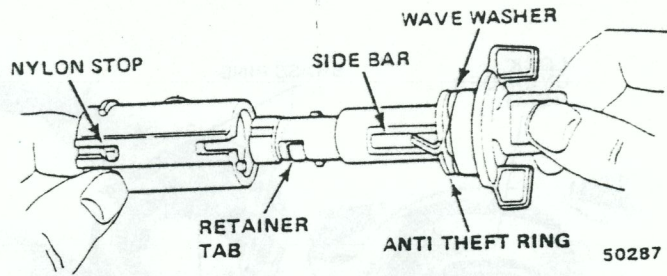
J-70 Assembling Lock Cylinder and Sleeve
